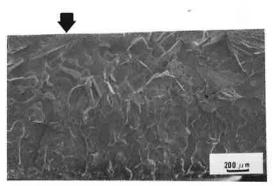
SEM fractograph of EB-Mo welds with or without Re filler after Trans-bend test (brack arrow shows origin of fracture)
